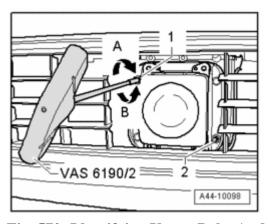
Identifying Upper Bolts And Lower Bolts Courtesy of VOLKSWAGEN UNITED STATES, INC.
